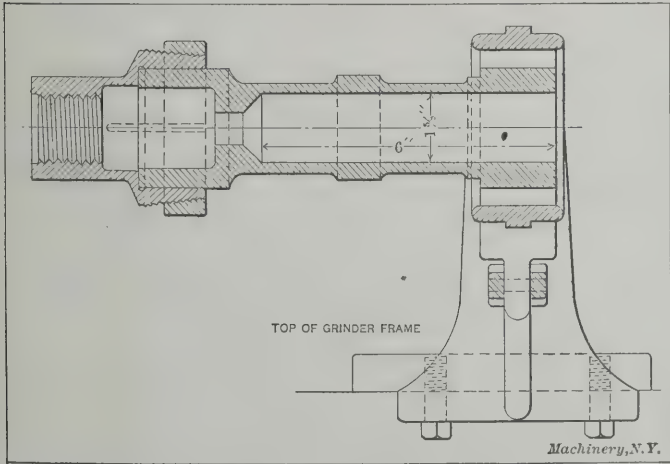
Plan in Section of Grinder Rest and Chuck with Work in Place
